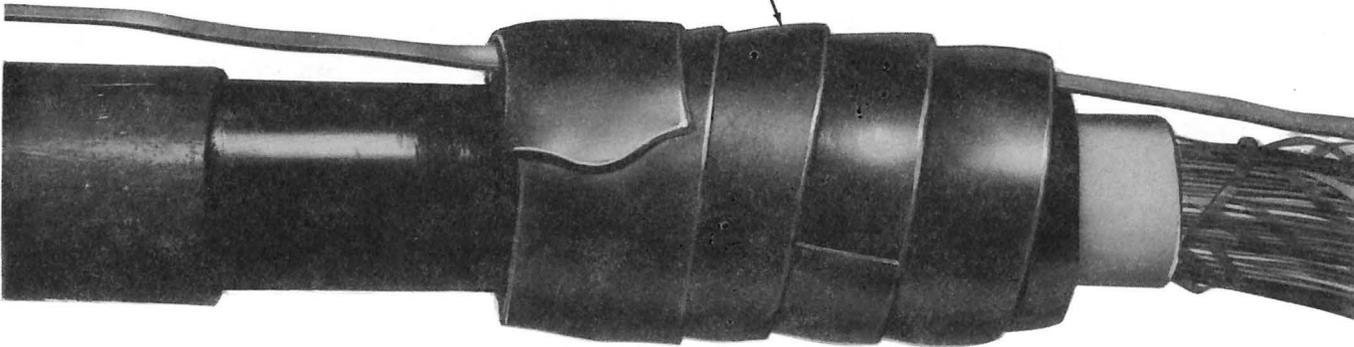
Inner Joint Wrapped with B Sealing Tape
